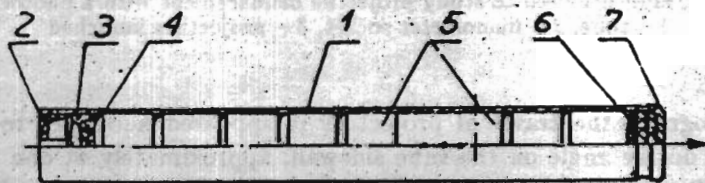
Tube launcher; 1 - tube, 2 - tube bottom, 3 - ejection charge, 4 - pusher plate, 5 - projectile, 6 - tube packing, 7 - diaphragm
